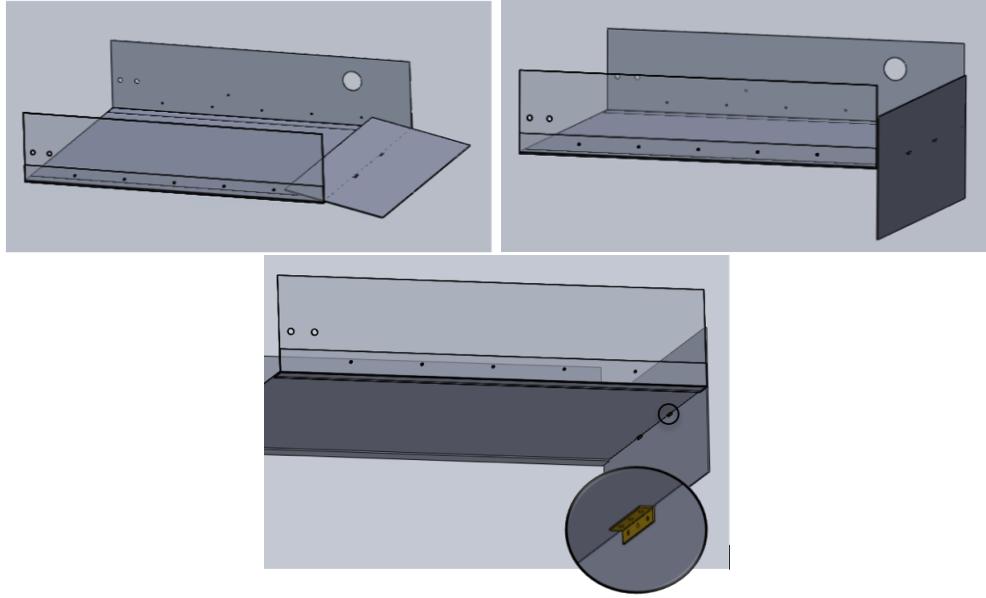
Solidworks models of proposed, hinged ramp/foot-guard design
